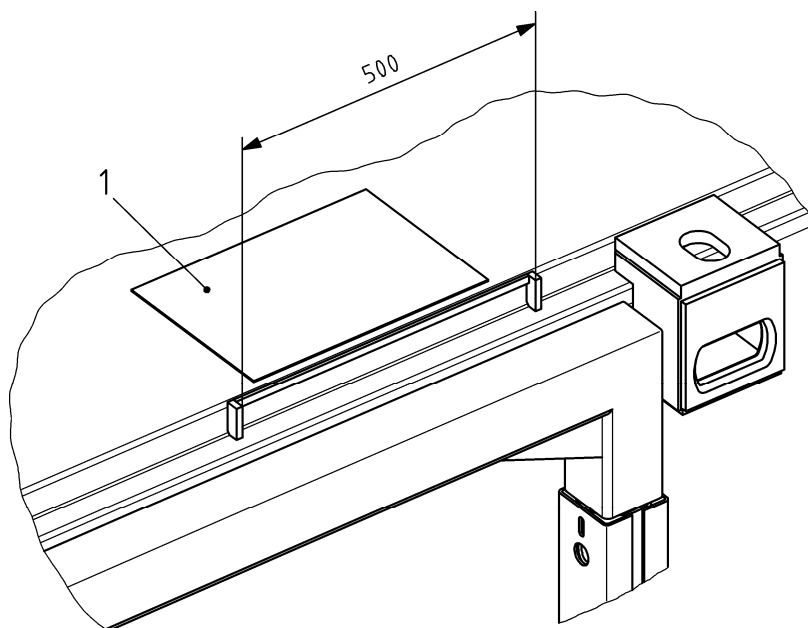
Grappler flange safety lip, end stops and wear-resistant plate – three dimensional view, seen from the bottom
